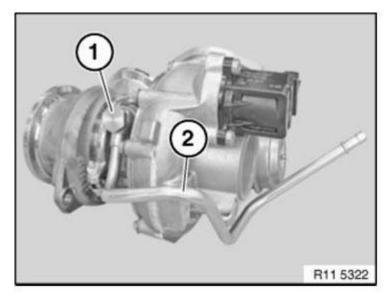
Identifying Coolant Feed Line And Banjo Bolt Courtesy of BMW OF NORTH AMERICA, INC.
